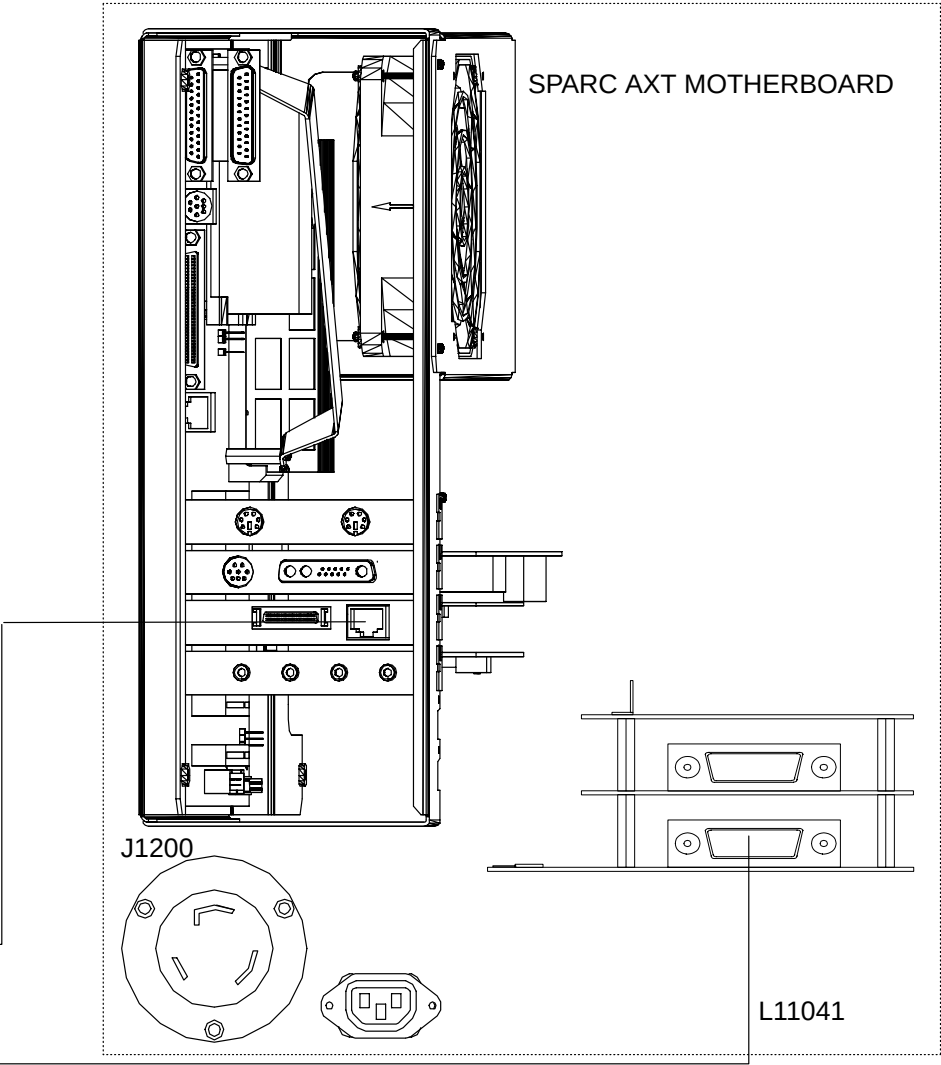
DISPLAY TOWER TO ACQIMAGE TOWER CABLING DETAIL
